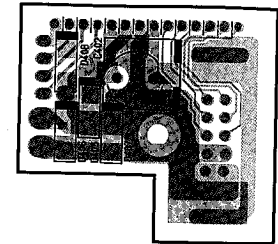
Power Supply Section-Dip Side View
